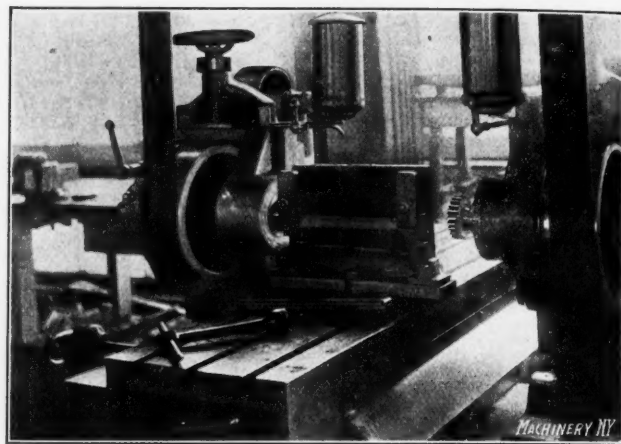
View showing Position of Milling Fixture with Reference to Cutter, when Stationary
